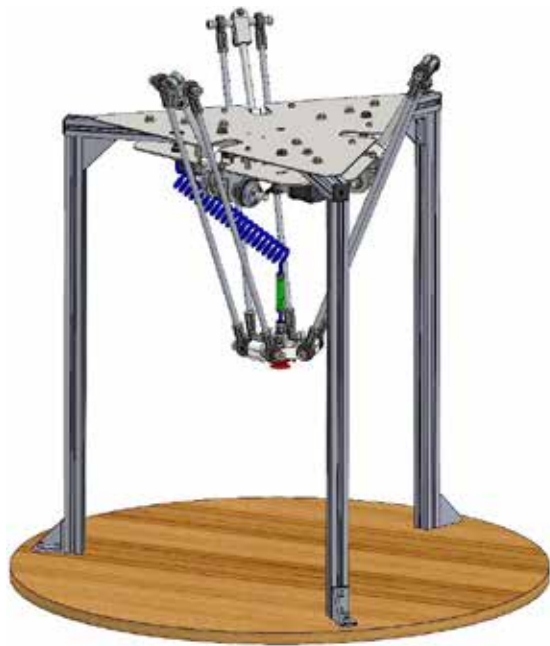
CAD model of the delta robot structure and robot gripper with vacuum ejector
